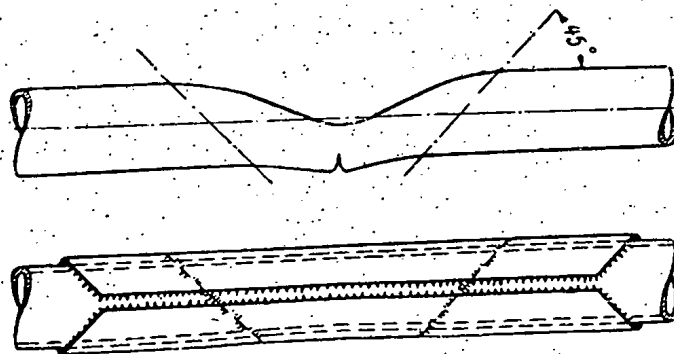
Repairing a tube with a dent on one side and a crack on the opposite side
